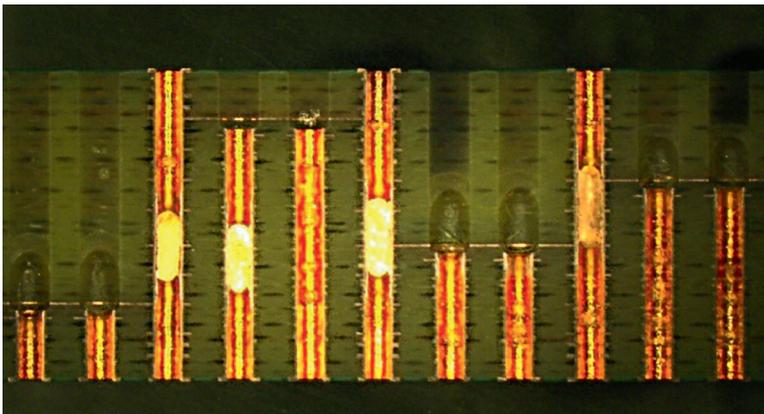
Cross-section through a multi-layer board with deep and through drill holes (microsection)
